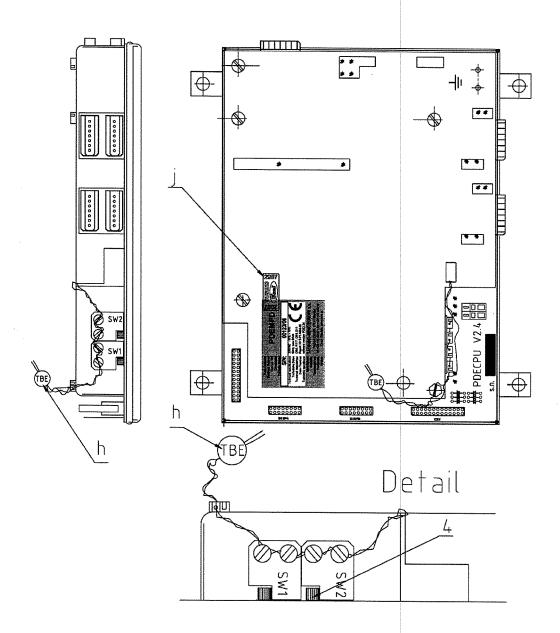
The sealing of FP-1001 pumping unit with Air Flow Sensor
